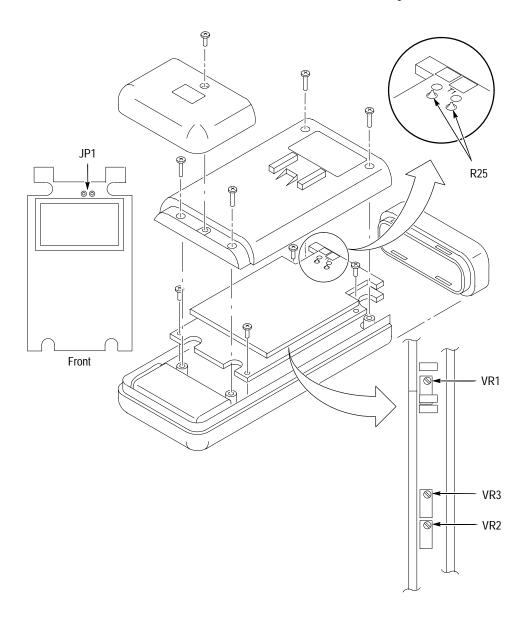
DTM920 Thermometer disassembly, test points, and adjustment locations
